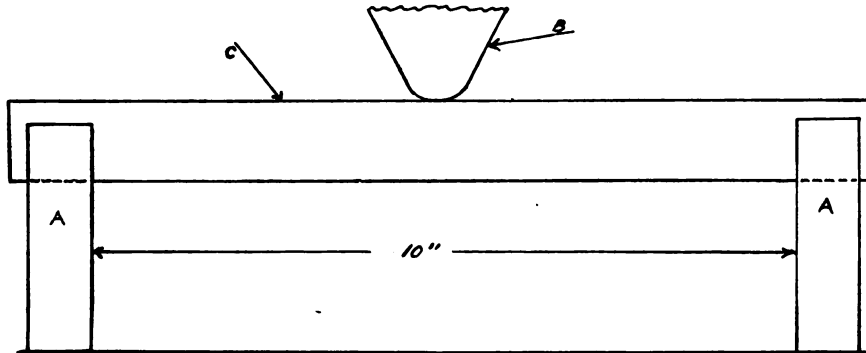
THE POSITION OF THE PIECE IN THE TESTING MACHINE MAKES A DIFFERENCE IN THE APPEARANCE OF THE BREAK
